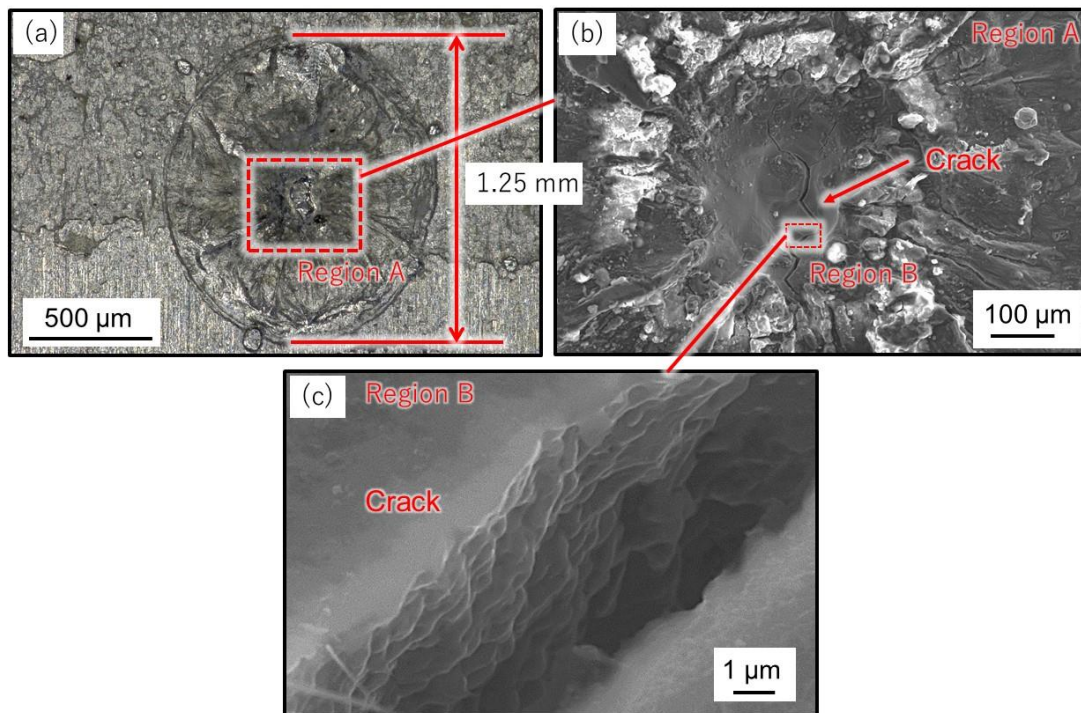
Surface characteristics of the crack in the spot weld of A5083 observed by Optical scope and SEM: (a) overall view of the spot weld, (b) enlarged view of the crack zone, (c) crack surface.
